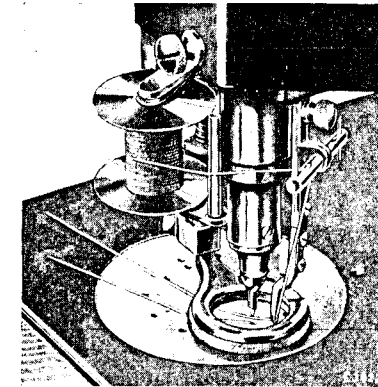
Machine Threaded and Adjusted for Two Thread Cording
